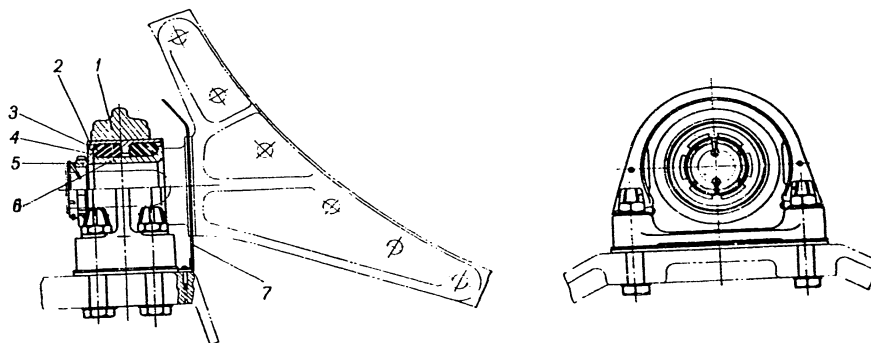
BRACKET FOR INSIDE ENGINE ATTACHMENT IN REAR ZONE
